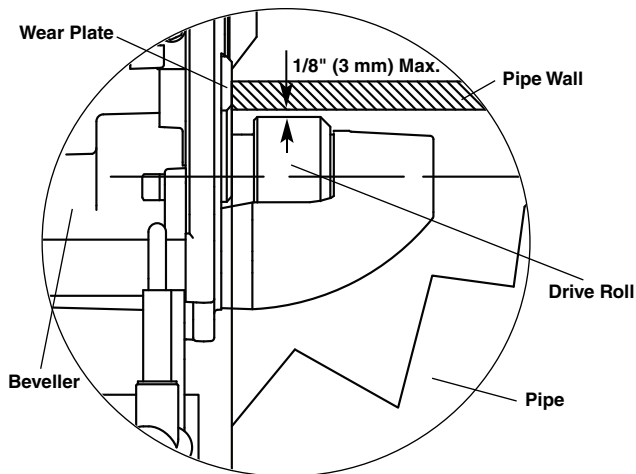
Fixed Beveller, Pipe Position relative to Beveller Drive Roll (Cut Away Pipe - Prior To Gripping)
